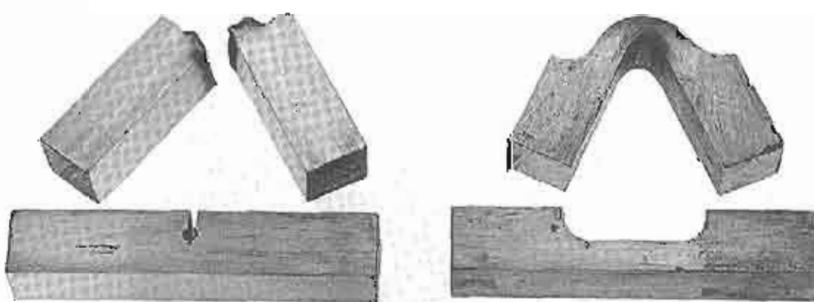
Notched and unnotched impact specimens before and after testing. Both specimens had the same cross-sectional area, but the notched specimen fractures while the other doesn't.
